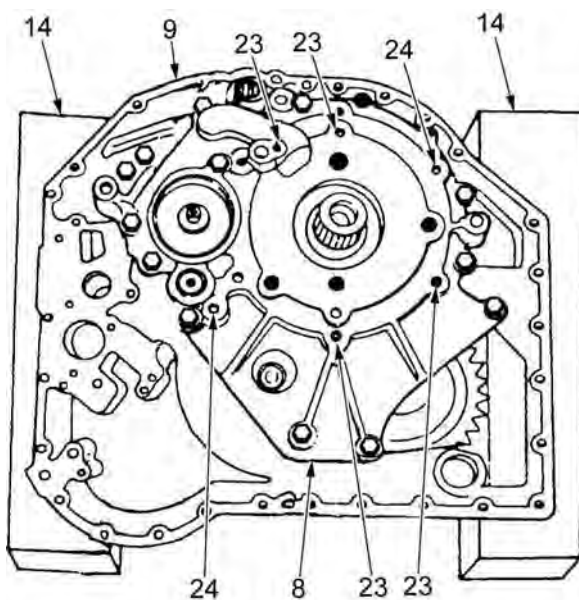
Right Brake Support Assembly Placement on Right Cover Assembly.
